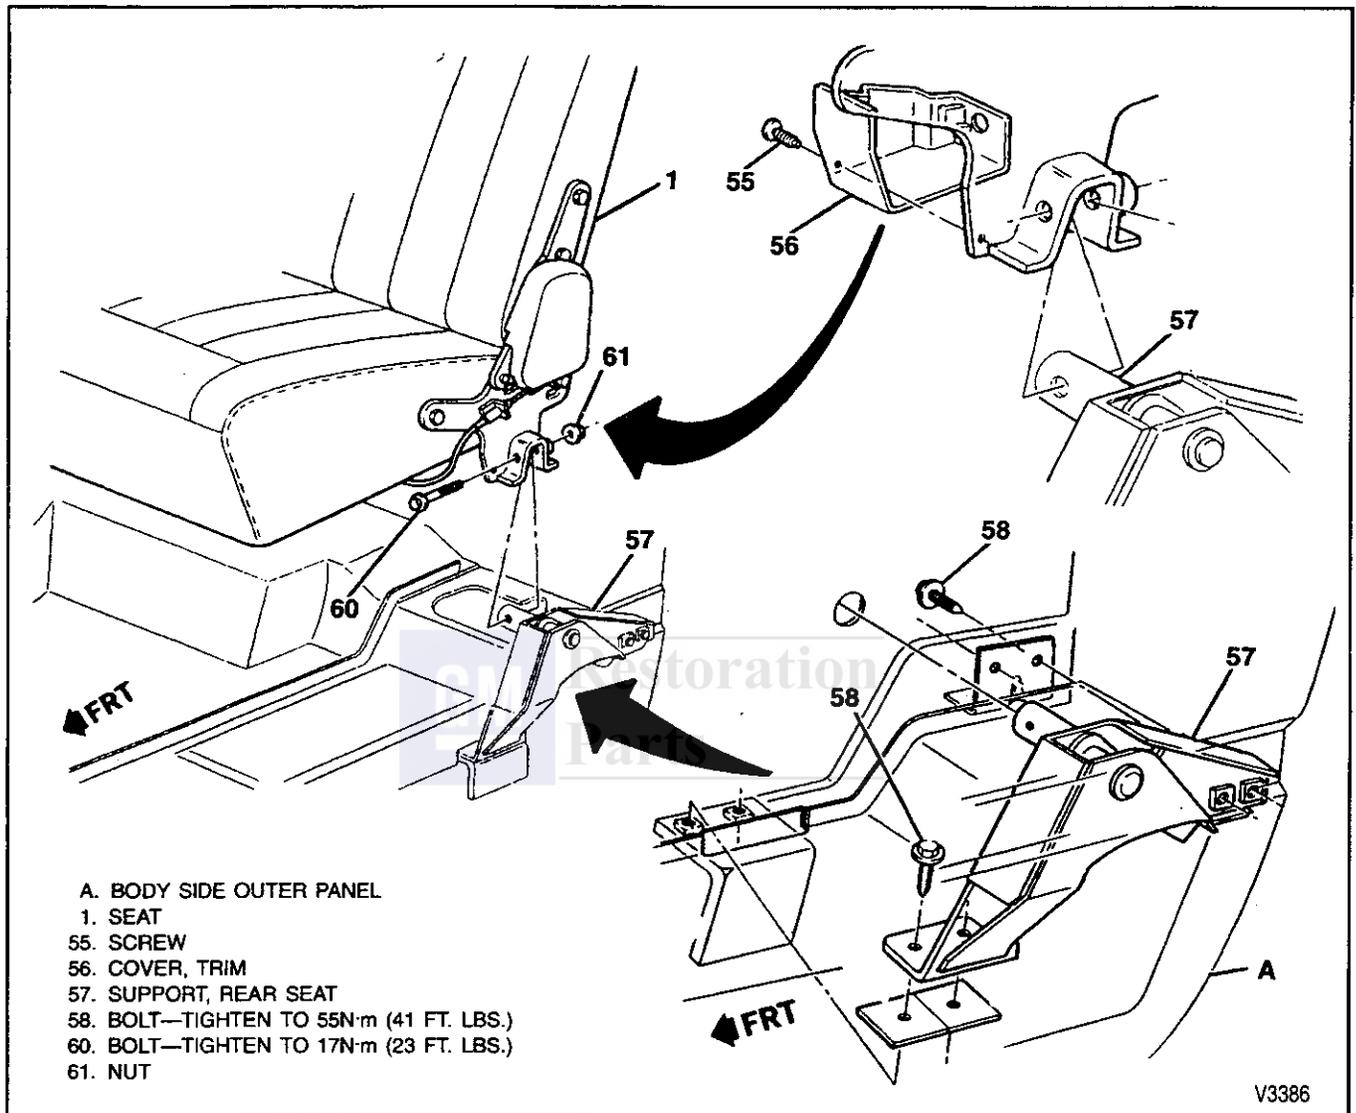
Rear Folding Seat Mounting (Extended Cab)
